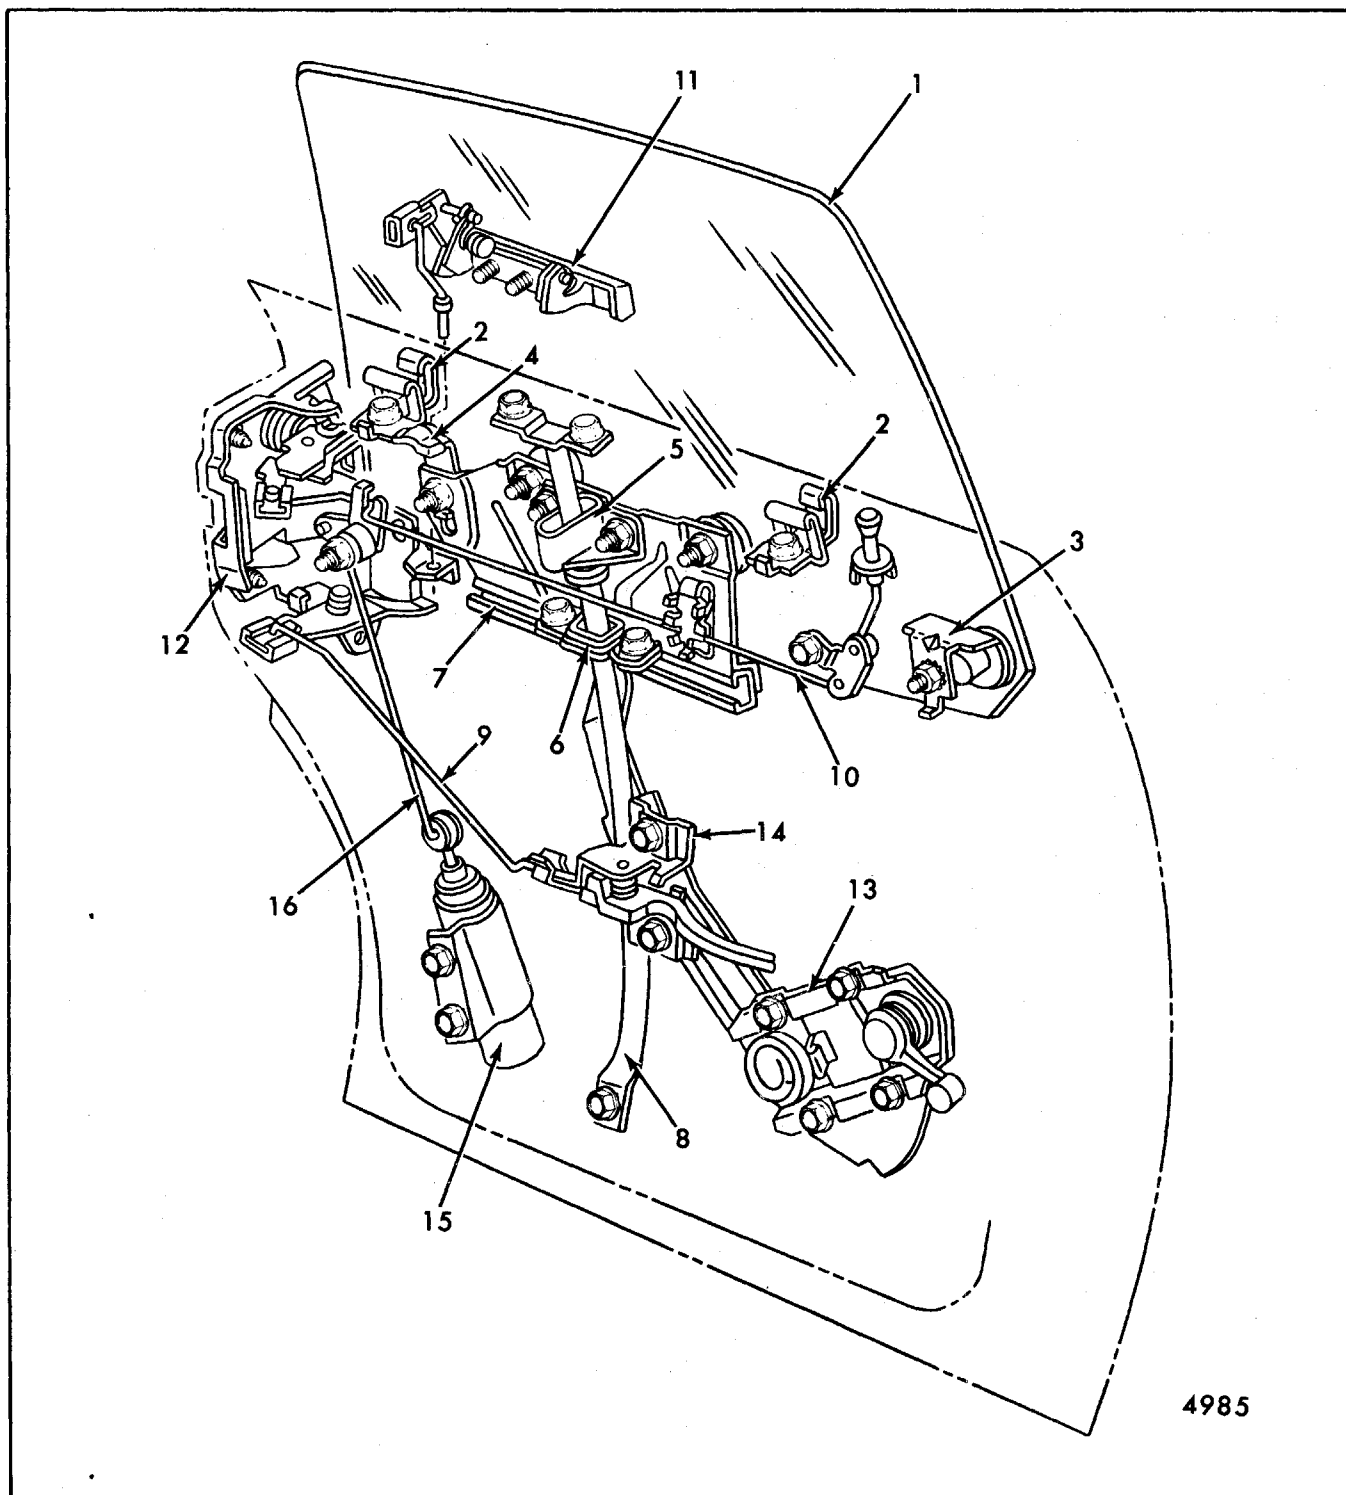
Rear Door Hardware - "A-29,35" Styles
